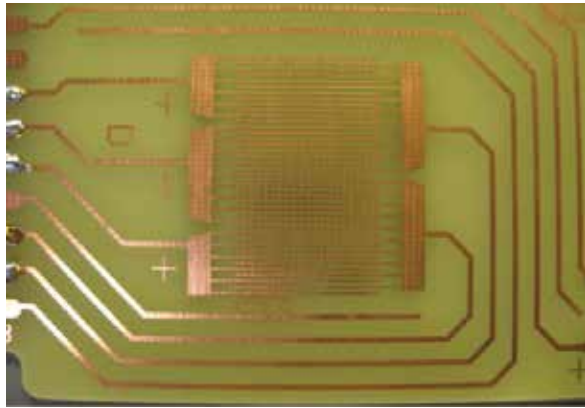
IPC-B-25A test board coated with 3M™ Novec™ 2704 Electronic Grade Coating (test sample 2704-1) after testing per IPC-TM-650 2.6.3.4 (rev. A) test method.
